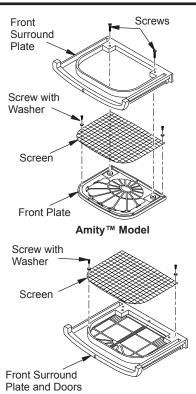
Removing Front Assembly (Oxford™ Model Shown)
